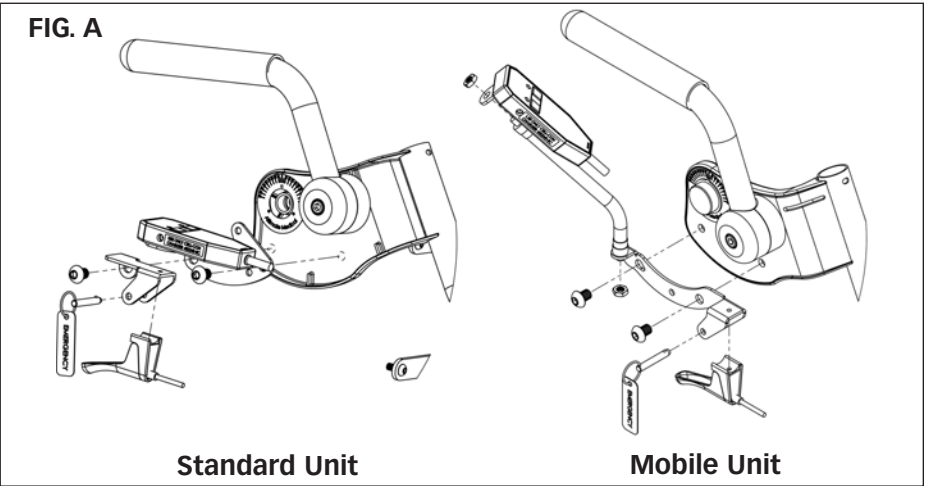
FIG. A- Assemble the hand control onto the unit in reference to the drawing.
